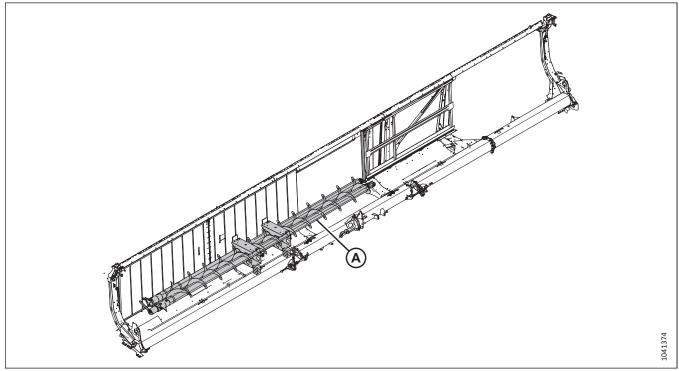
Double-Reel Header with Two-Piece Upper Cross Auger (UCA)
